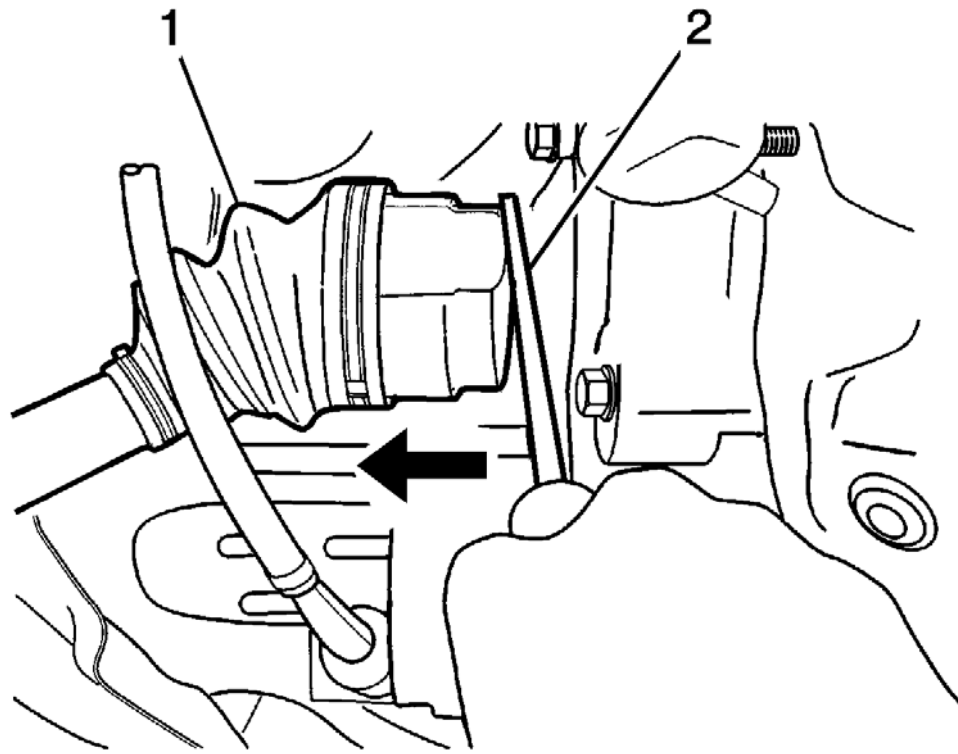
Removing Wheel Drive Shaft Using Large Flat Bladed Tool
